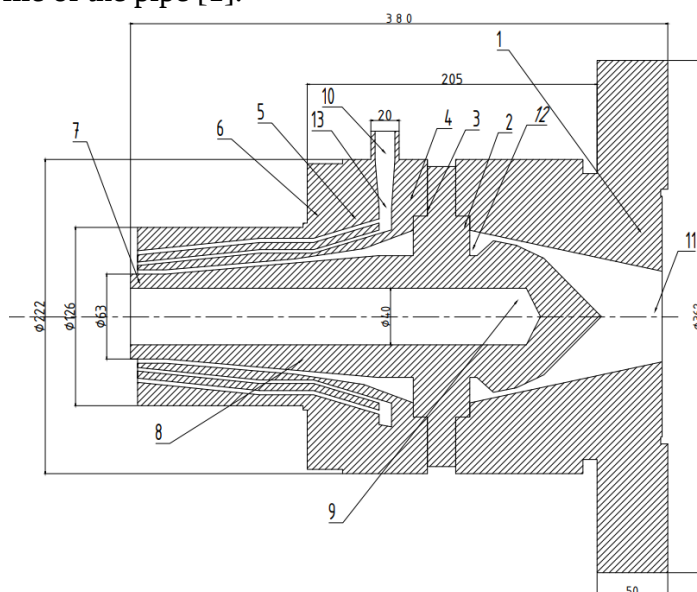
Schematic representation of the extruder head for double-layer pipes: 1 – adapter sleeve; 2 – distribution plate; 3 – interlocking mold; 4 – compression sleeve; 5 – outer die; 6 – die adjustment screw; 7 – mandrel; 8 – fixed mandrel; 9 – lock nut; 10 – support plate; 11 – inlet channel; 12 – distribution holes; 13 – auxiliary extruder channel
